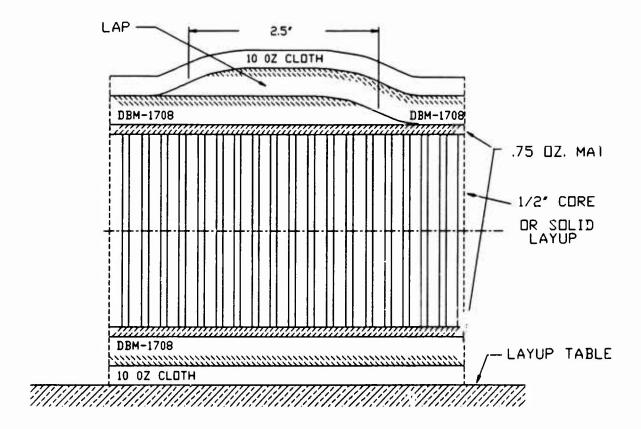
Longitudinal Section Through Lap in Reinforcement
